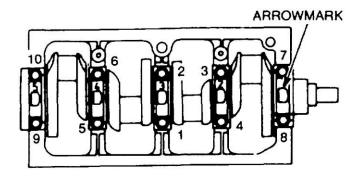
Crankshaft Bearing Bolt Tightening Sequence
